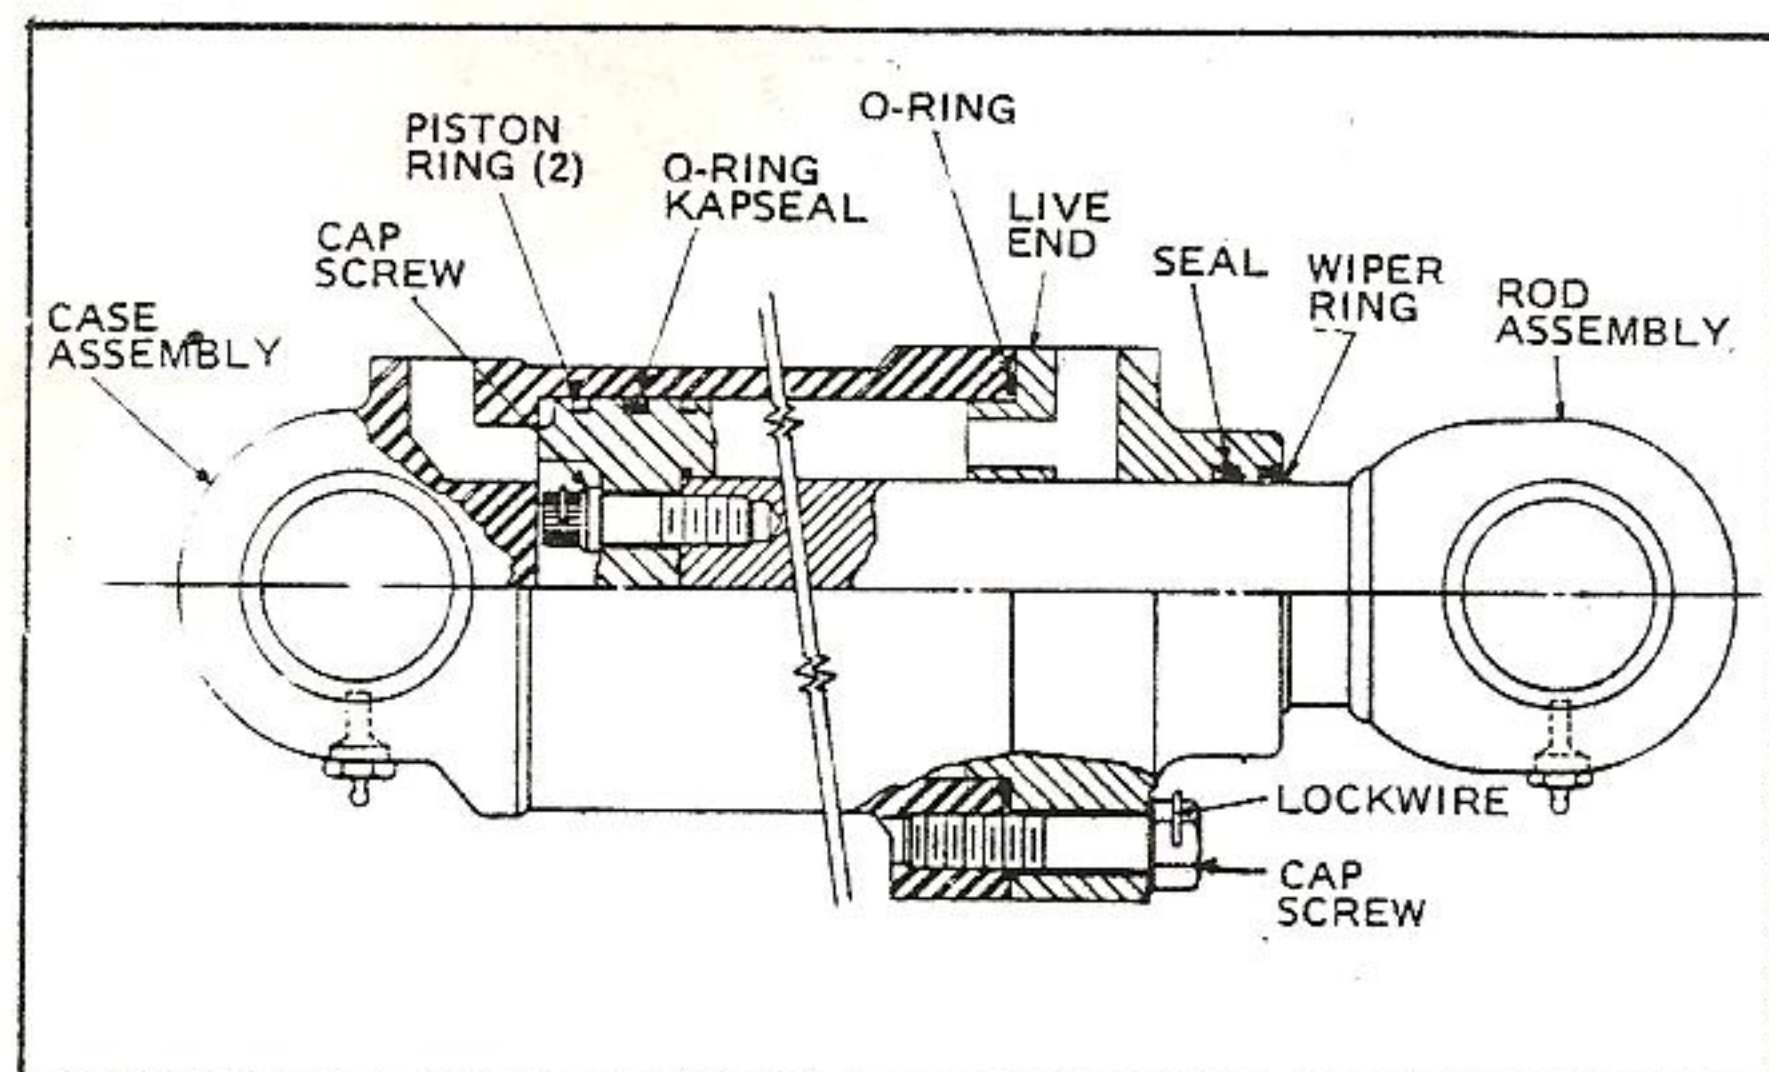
28. HYDRAULIC CYLINDER CROSS SECTION
